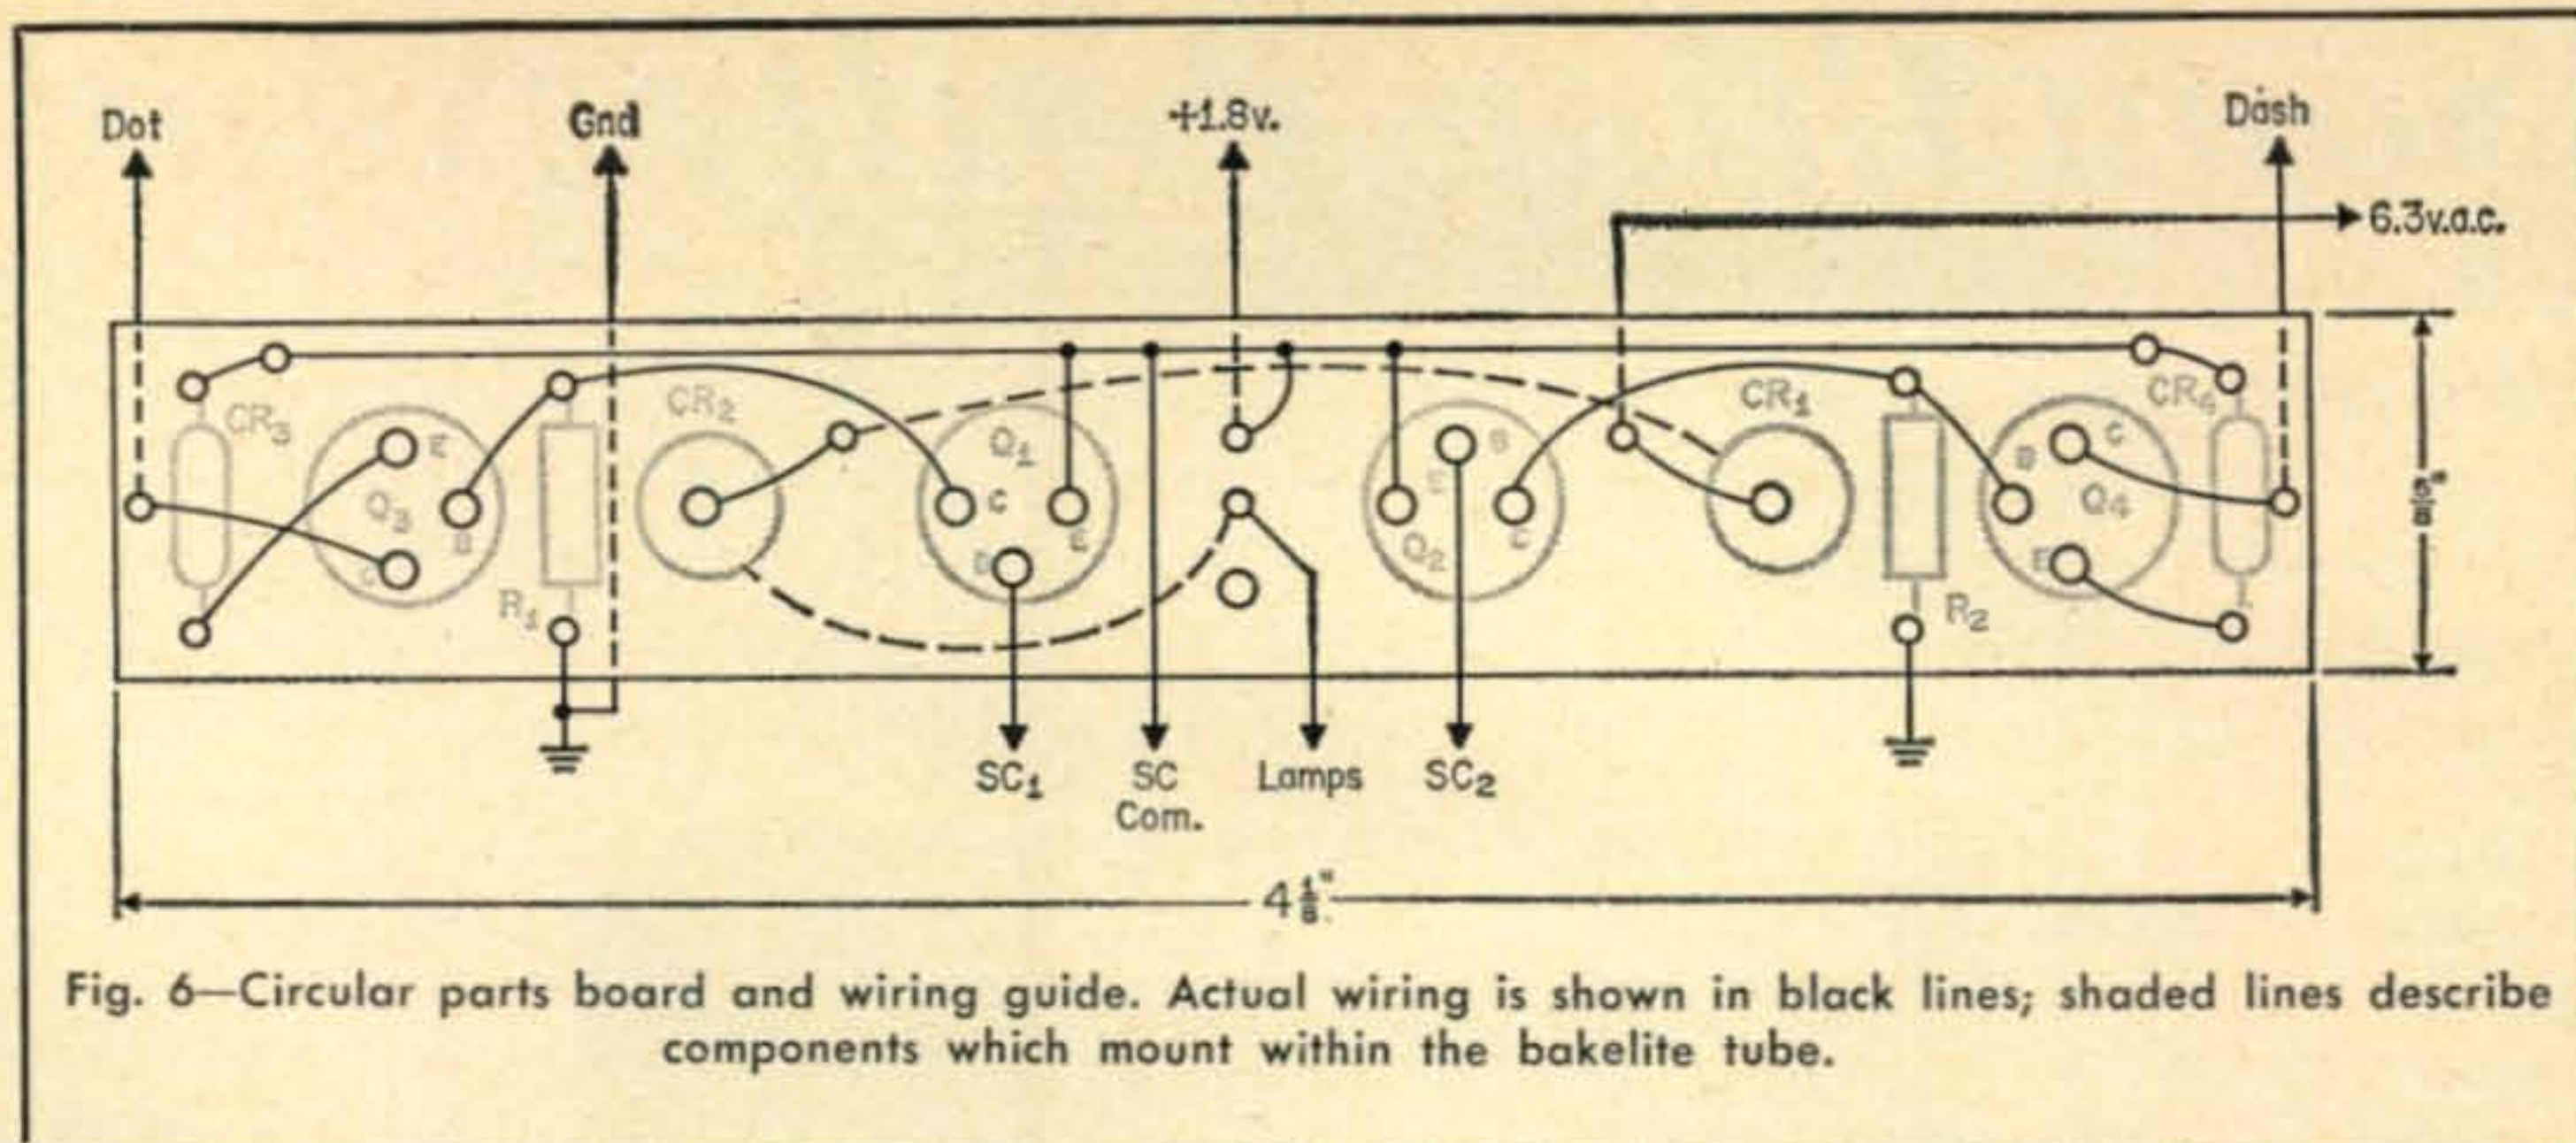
Circular parts board and wiring guide. Actual wiring is shown in black lines; shaded lines describe components which mount within the bakelite tube.
